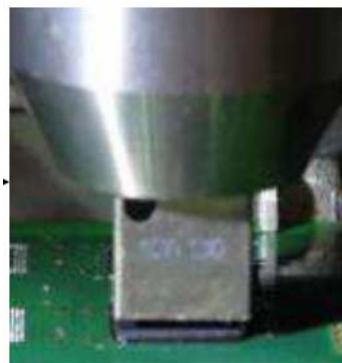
SRT Nozzle Lowered 2 mm to 3 mm from Component Top Surface
